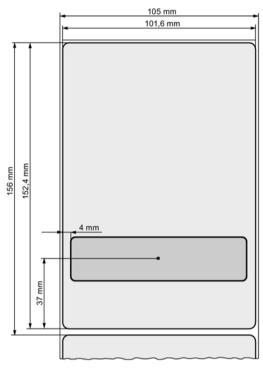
SIMATIC RF630L 6GT2810-2AB00 dimension drawing
